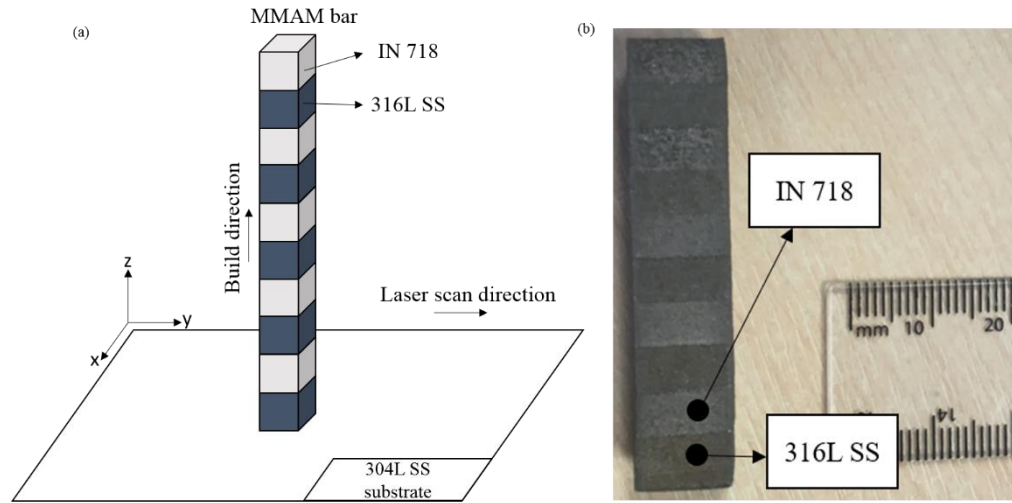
(a) Schematic and (b) as-built MM SLM-fabricated 316L SS/IN 718 bar using the ‘discrete material change between layers’ deposition strategy using the HK PM250 SLM machine.
